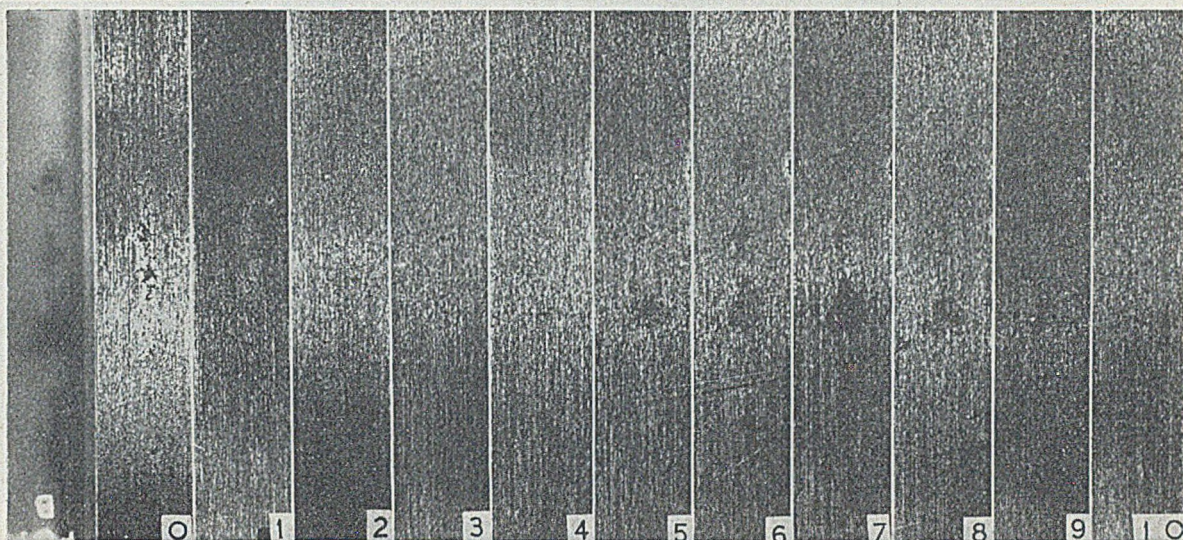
Test-bar PU.1.B (annealed); successive $\frac{1}{16}$ in. Layers have been machined from the Bottom Surface at "O" which had previously just been cleaned up; thickness of Specimen $\frac{1}{4}$ in. The Photograph should be compared with the Radiograph (on the left) of PU.1B.
